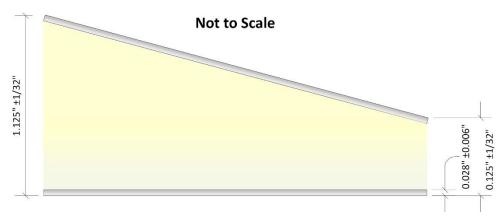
GOBOARD® WEDGE THICKNESS DIMENSIONS
